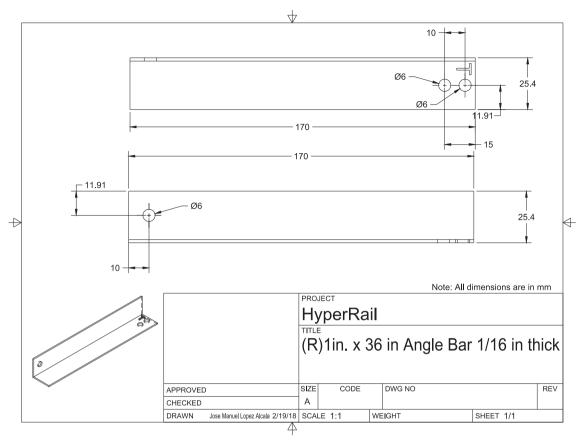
2D drawing of right aluminum angle bar. This will be directly attached to the aluminum C channel section.
